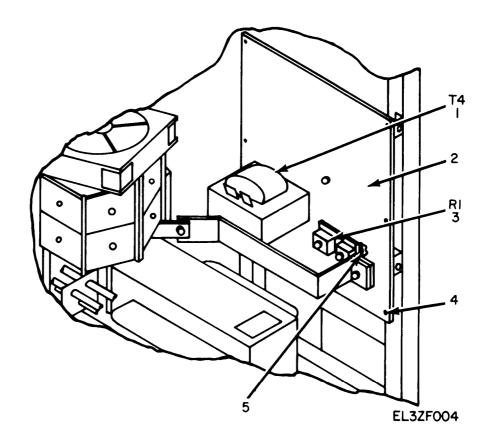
Power Supply PP-4606A/G, Component Plate Assembly.
